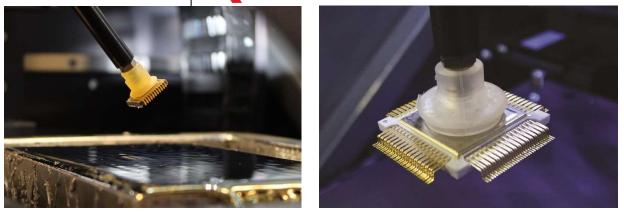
Quad flat pack (QFP) device during re-tinning (left), and QFP held with vacuum nozzle (right)
